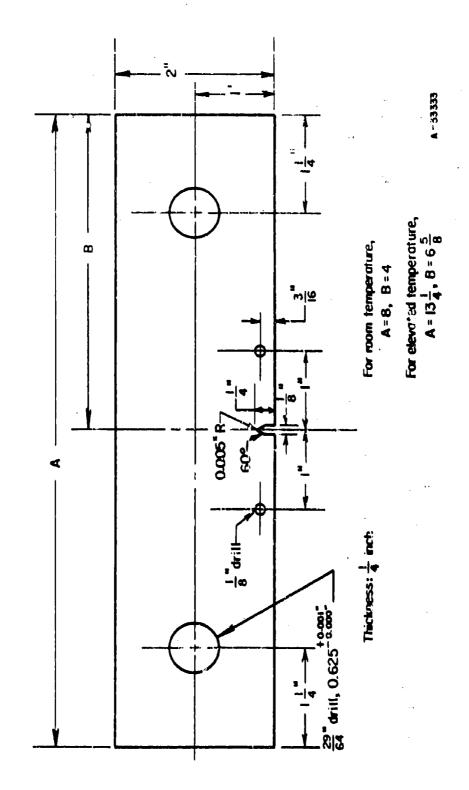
EDGE-NOTCH FRACTURE-TOUGHNESS SPECIMEN
